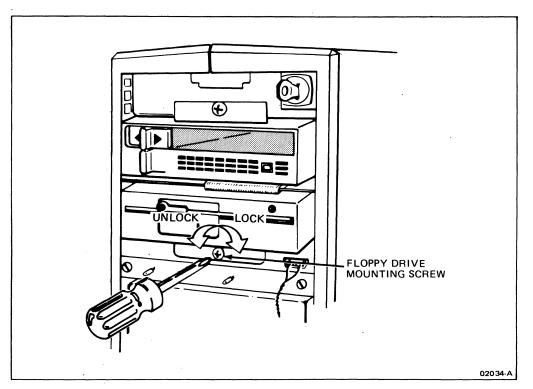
Locking/Unlocking the Floppy Drive Mounting Screw
